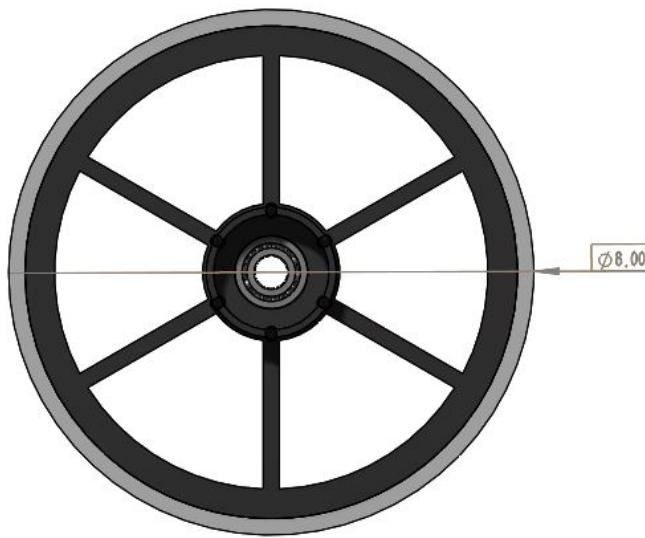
4" Radius (8" OD) Rubber Treaded Wheel
